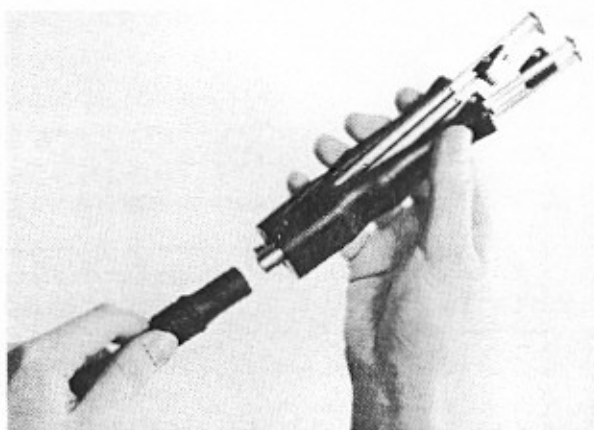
UNIVERSAL CORD ATTACHMENT
